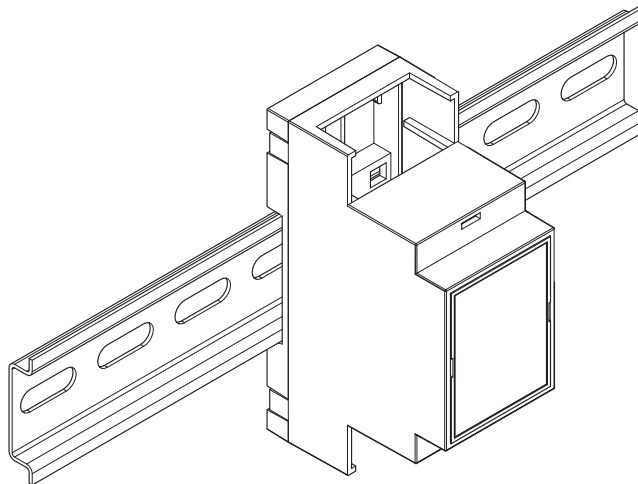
Enclosure mounted on DIN rail (circuit board not shown)
